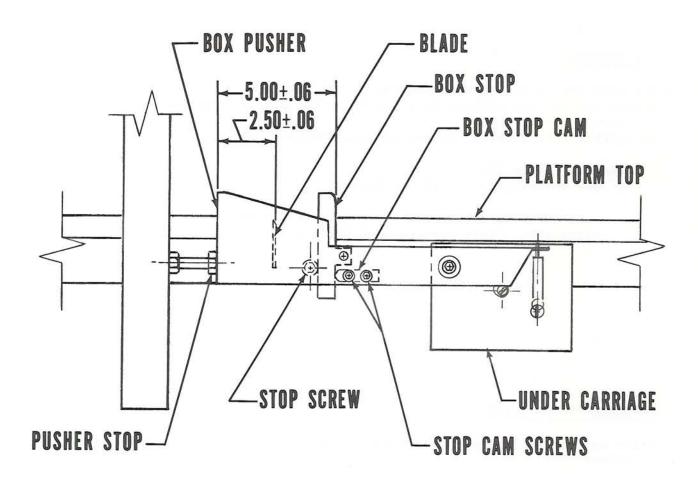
PUSHER STOP ADJUSTMENT - LEFT SIDE VIEW.
